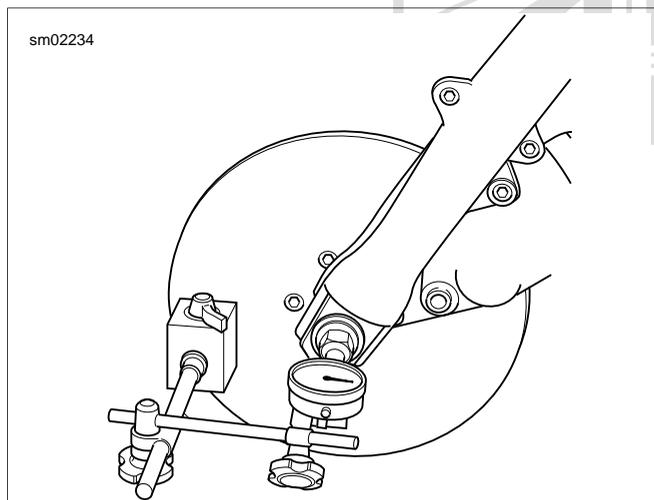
Wheel Bearing Inspection (Front Wheel Shown)
